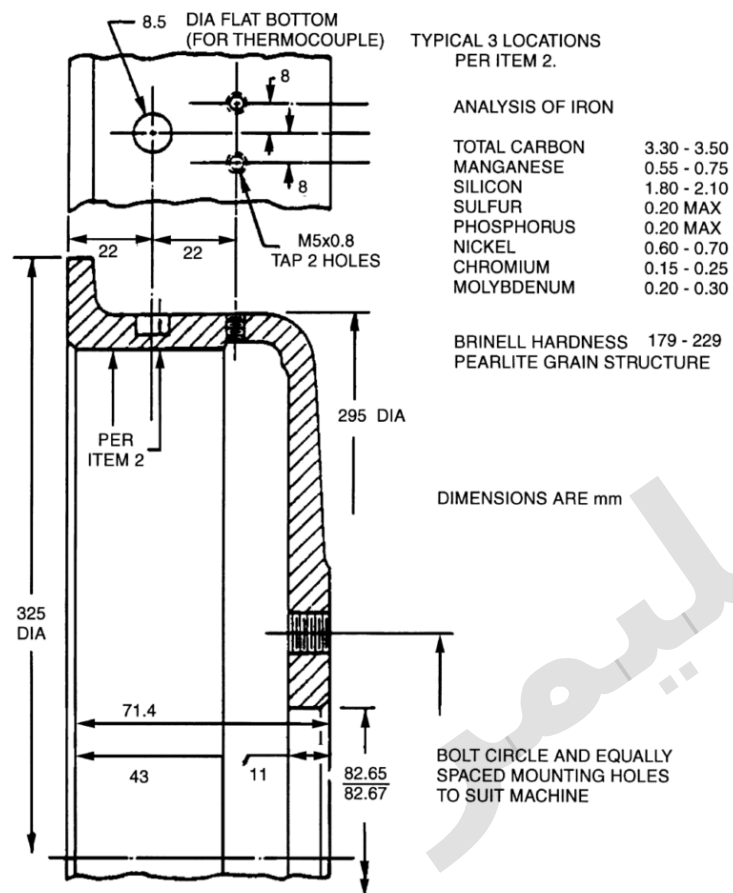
FRICTION MATERIALS TEST MACHINE DRUM
